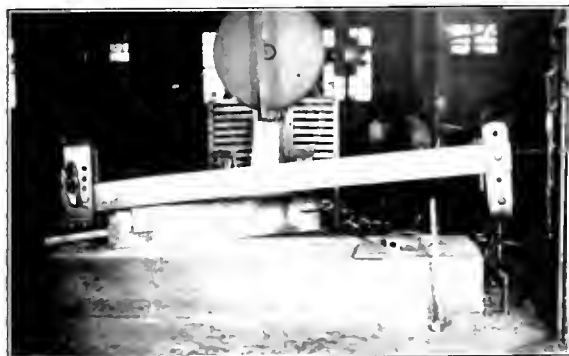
Pneumatic Forging Press Adapted to a Wide Range of Work
